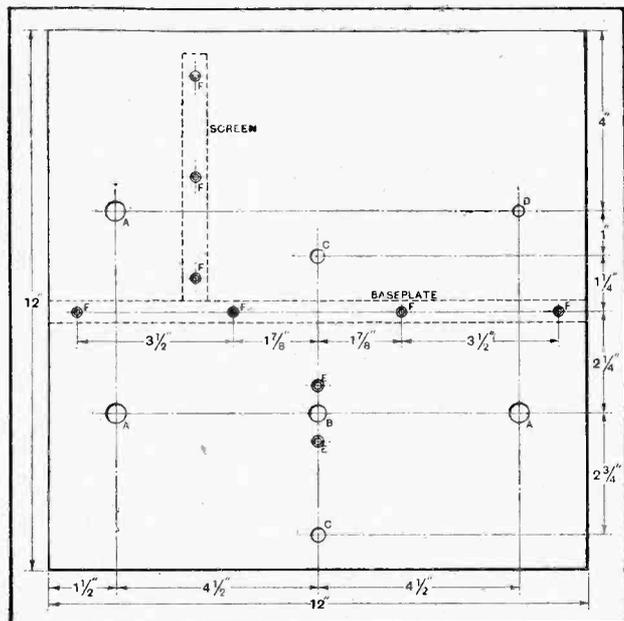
Drilling details of the 1/8 in. paxolin front panel. A, 7/16 in. dia.; B, 3/8 in. dia.; C, 5/16 in. dia.; D, 1/4 in. dia.; E, 5/32 in. dia., countersunk for 4B.A. screws; F, 1/8 in. dia., countersunk for 6B.A. screws.
